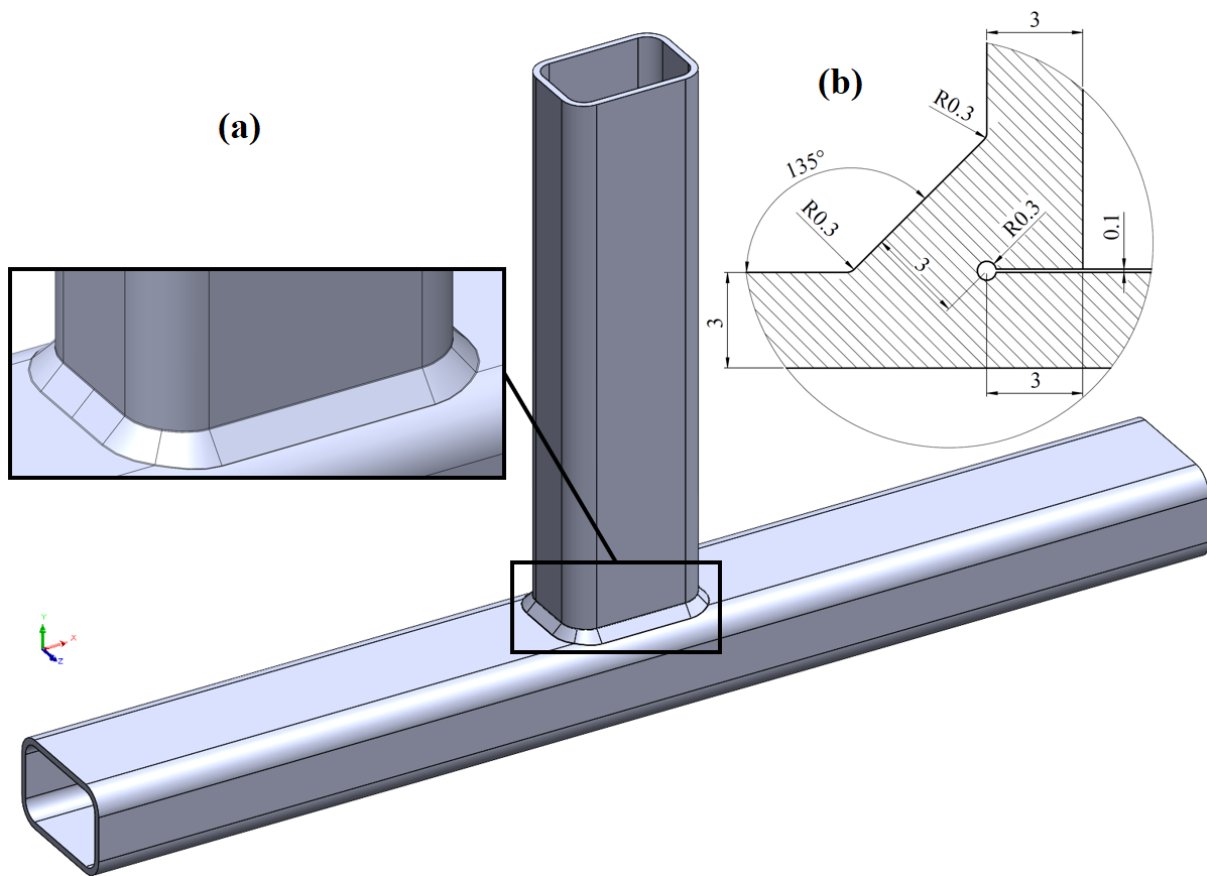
Welded specimen for *FEMFAT Weld* validation: (a) CAD model with detailed weld geometry, (b) cross section of the weld along the short side of the hollow section
